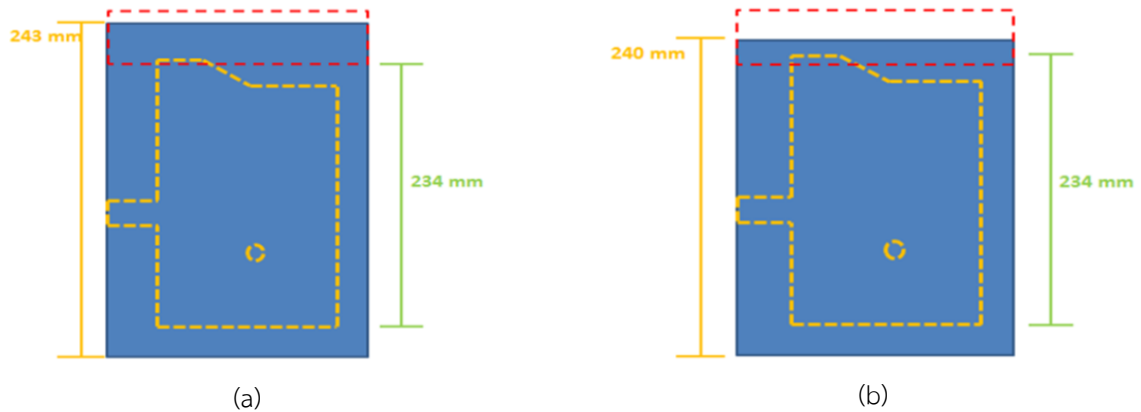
Feed distance. (a) 243 millimeter. (b) 240 millimeter.
